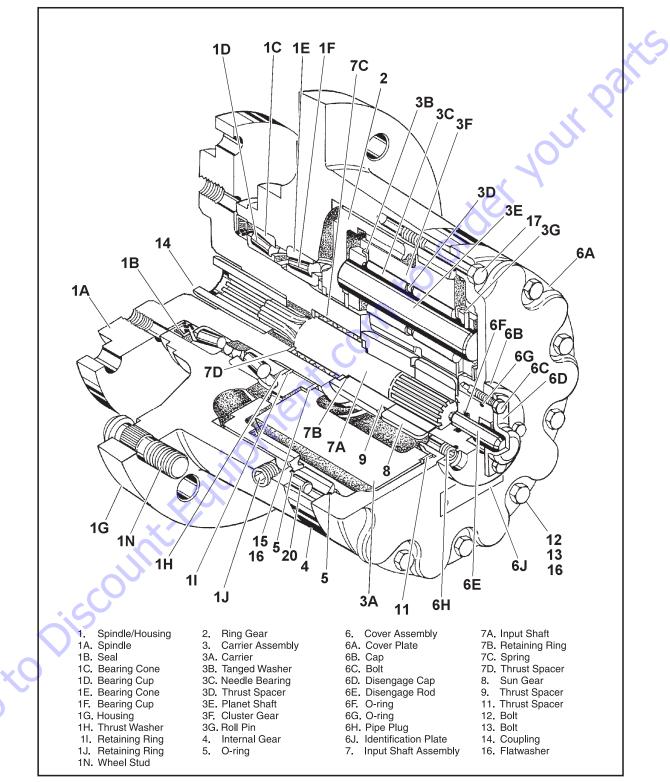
Torque Hub (S/N 39594 to Present) - Cutaway View
